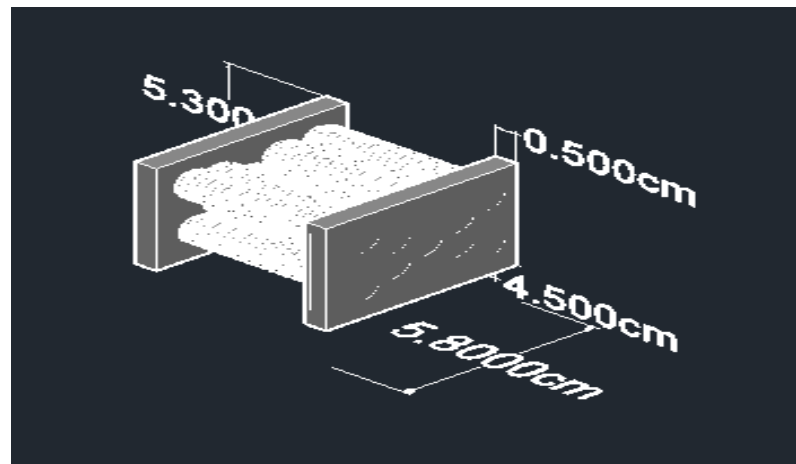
Final Design of Spring Coil Holder (South-East View)
